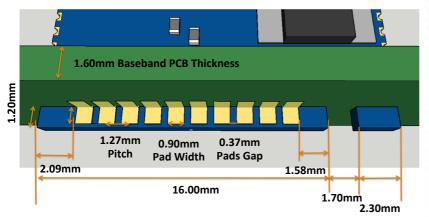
Dimensions of BGMS' TOP and BOTTOM pads when applying Slot-In Mounting
